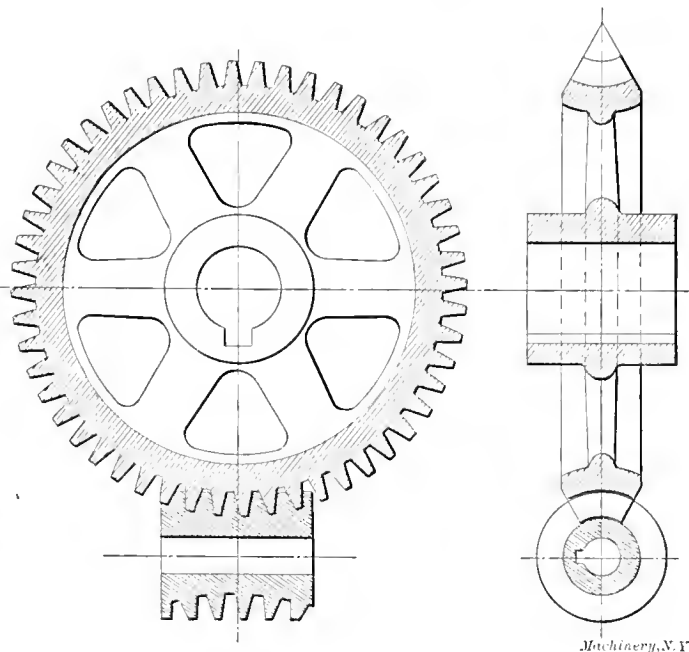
The Form of Globoid Gearing generally known as Hindley Worm Gearing.
